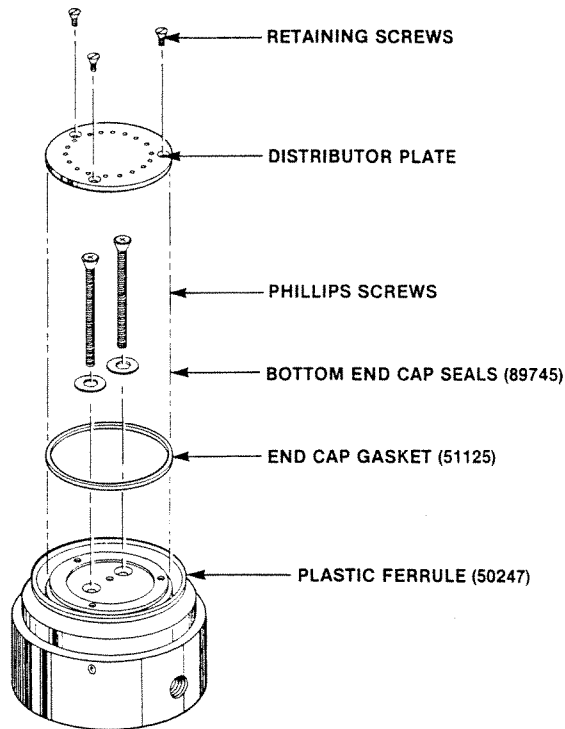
BOTTOM END CAP ASSEMBLY
